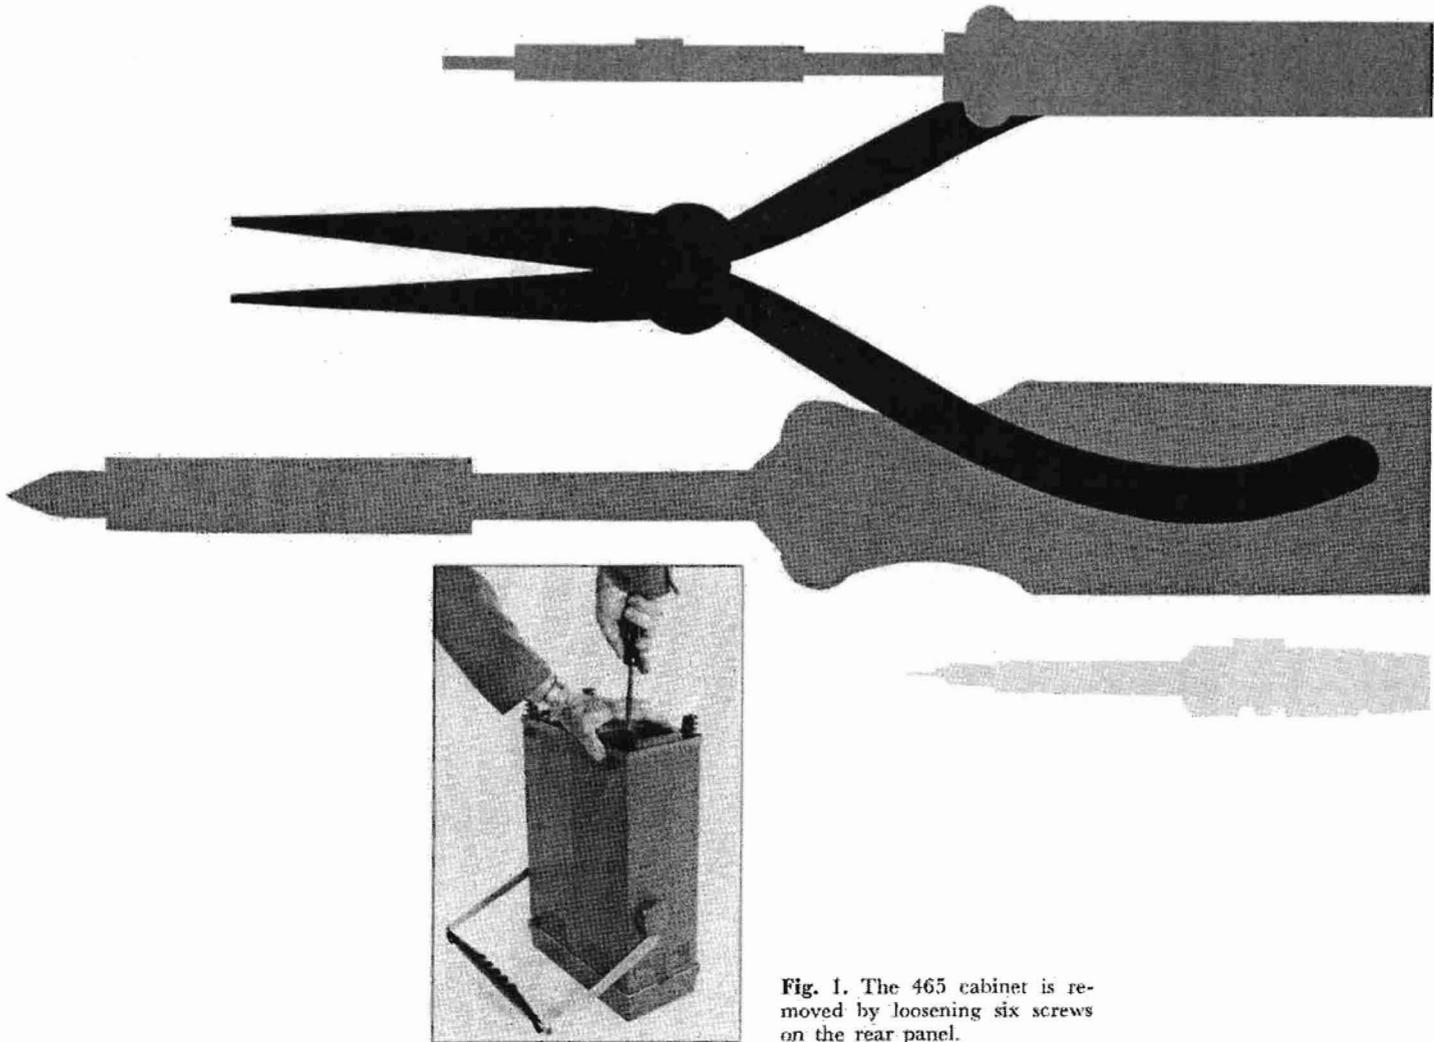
The 465 cabinet is removed by loosening six screws on the rear panel.
